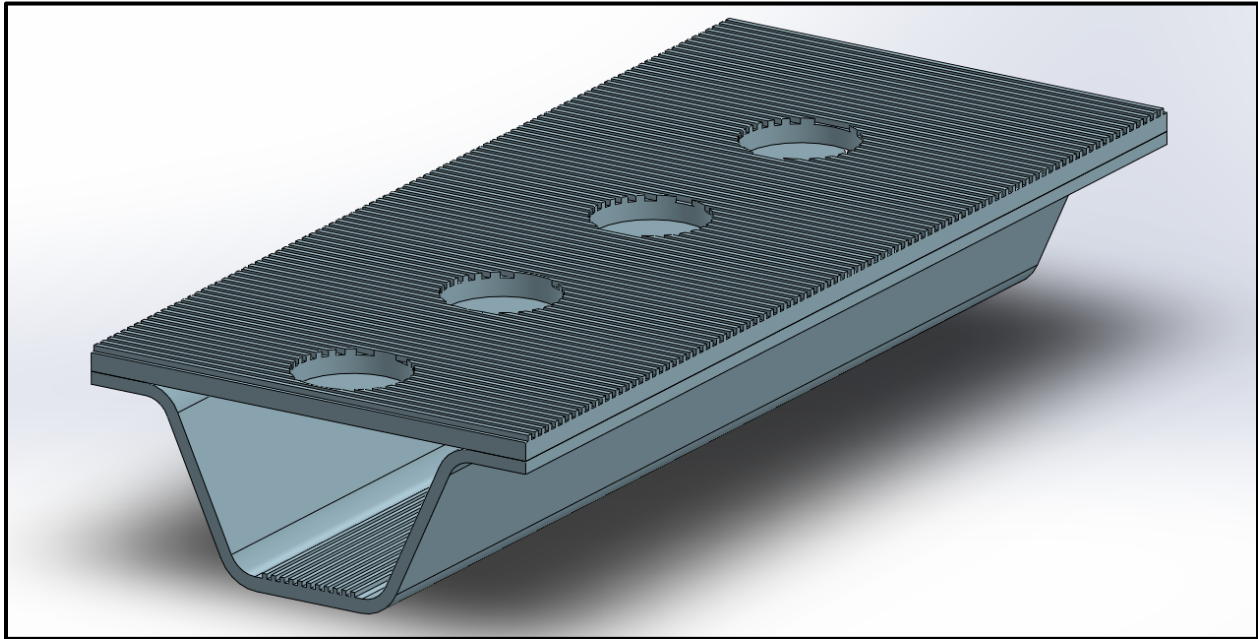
Section View of Closed-Corrugation with Grooved Surfaces
